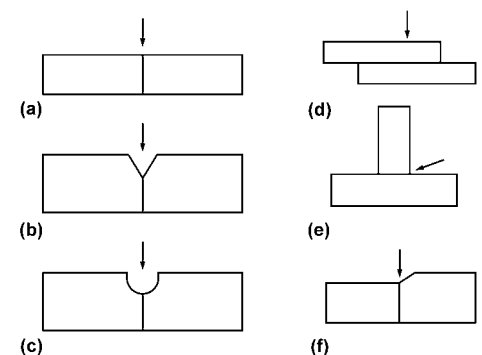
Example joint designs for hybrid laser arc welding. (a) Square butt. (b) V-groove. (c) U-groove. (d) Lap weld. (e) Fillet weld. (f) Dissimilar-thickness joint
